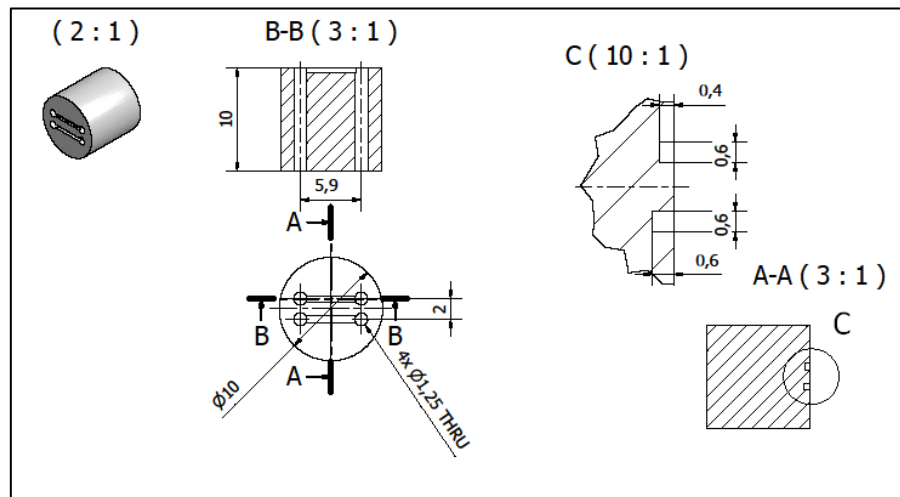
Test sensor 8 from Müggler (project partner)[12]
